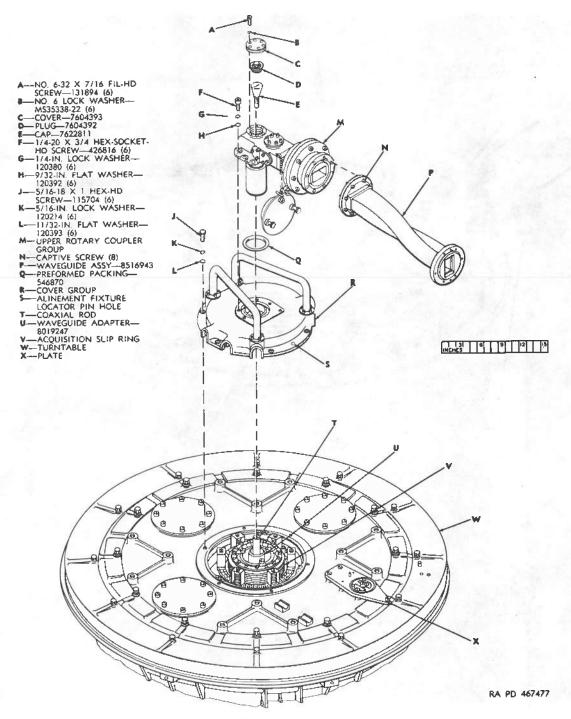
Removal and installation of upper rotary coupler group and cover group.
